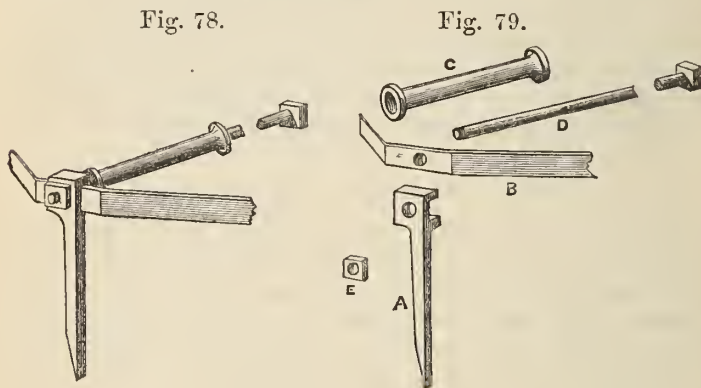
is a view of one of the teeth and parts of the beam, in order to show the joint; and Fig. 79 is the same as Fig. 78, but with the different parts detached, so as to show each separately. It will be seen by Fig. 79 that the tooth A is formed with a grooved head, which fits on the side of the beam B, and elips it tightly, thereby throwing the strain on the tooth directly on the beam; the bolt D which passes through both, merely serving to maintain the different parts in their relative position to each other. C is a tube or collar through which the bolt D, which secures each row of teeth, passes, and which serves to maintain the harrow beams at their proper distance from each other; the whole when put together and the bolt tightened up by the nut E, being almost as rigid as if in one piece.
